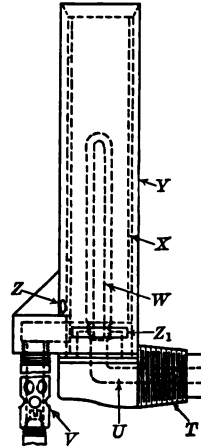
HOT-TUBE IGNITER, REID GAS ENGINE
